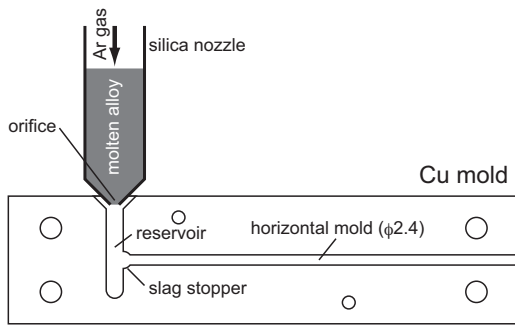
Cross section of a Cu horizontal mold used for casting a metallic glass rod.
